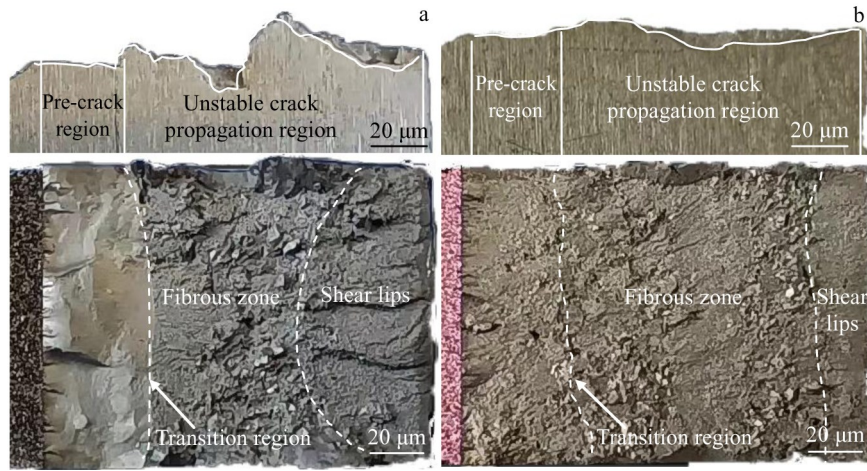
Fracture appearances of S-A (a) and S-B (b) specimens
